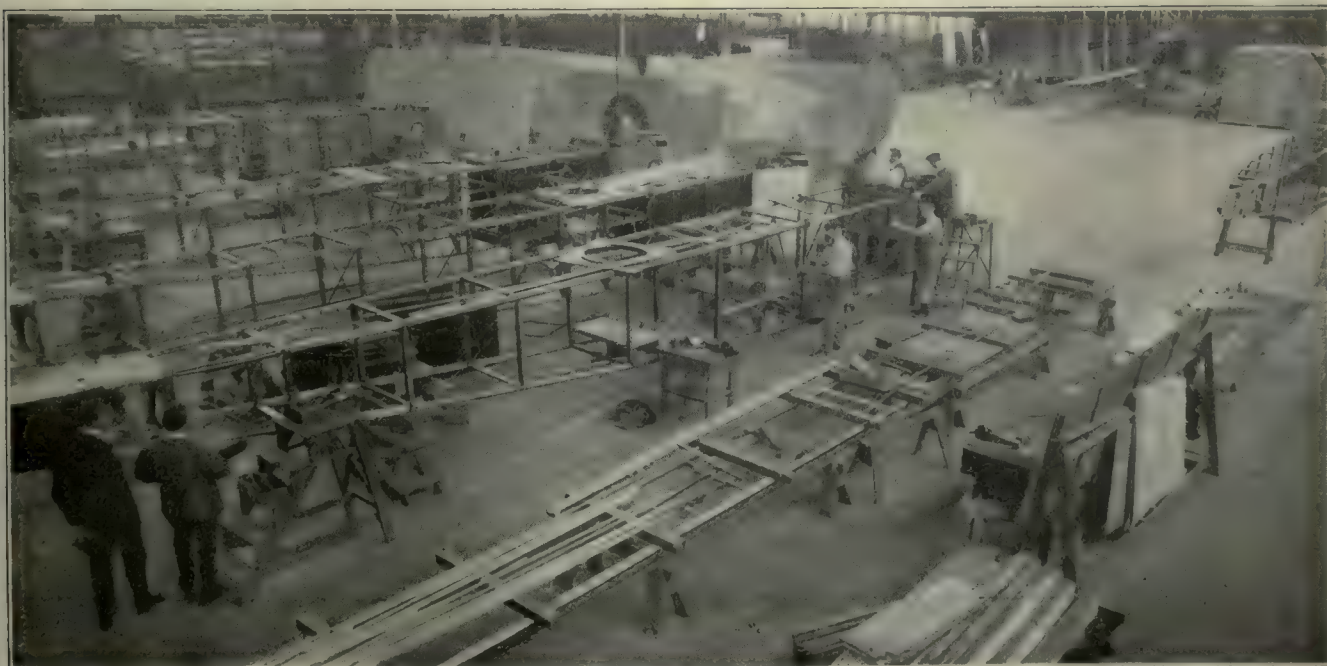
GENERAL VIEW OF ASSEMBLING SHOP
